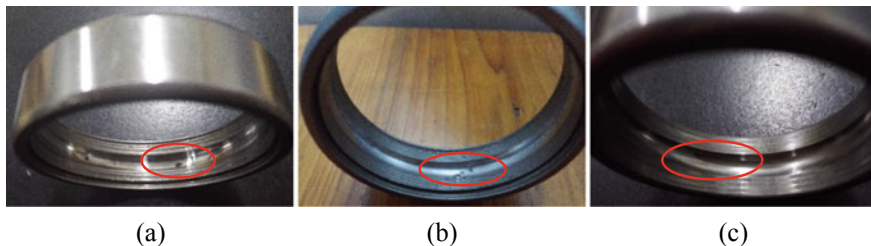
a Outer ring pitting; b outer ring crack; c outer ring current damage
